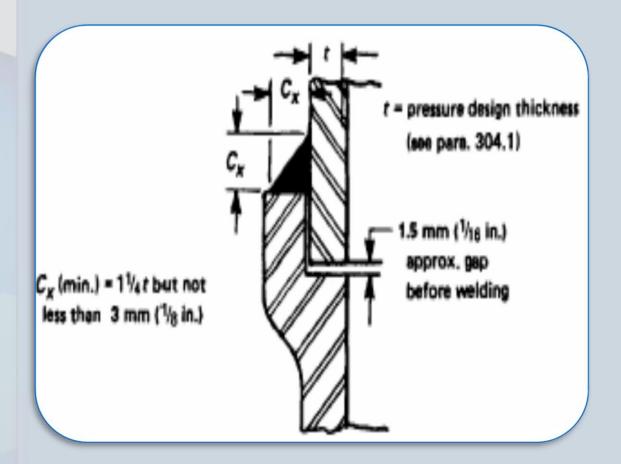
Minimum welding dimensions for socket welding components (ASME B31.3)
